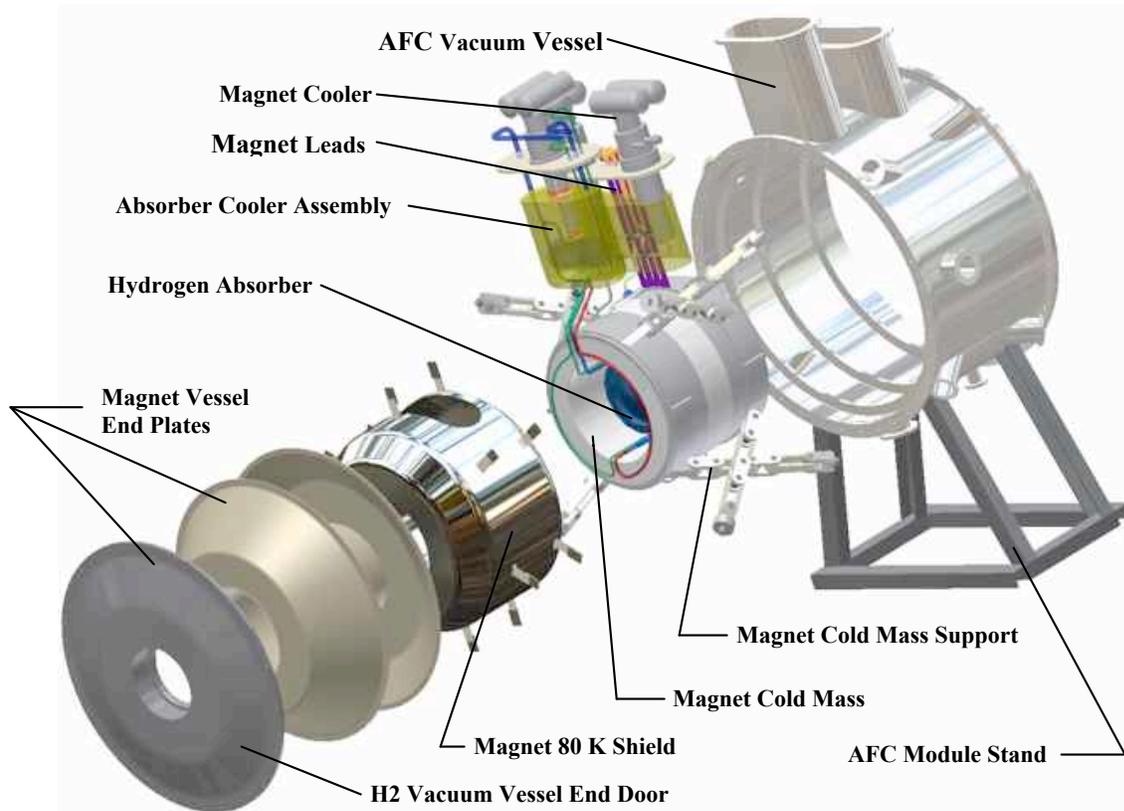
A schematic exploded view of the AFC module showing the magnet, the magnet coolers, the absorber, and the absorber cooler.
